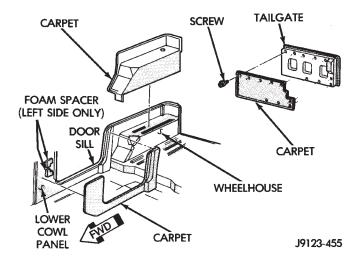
Wheelhouse, Door Sill and Tailgate Carpets
